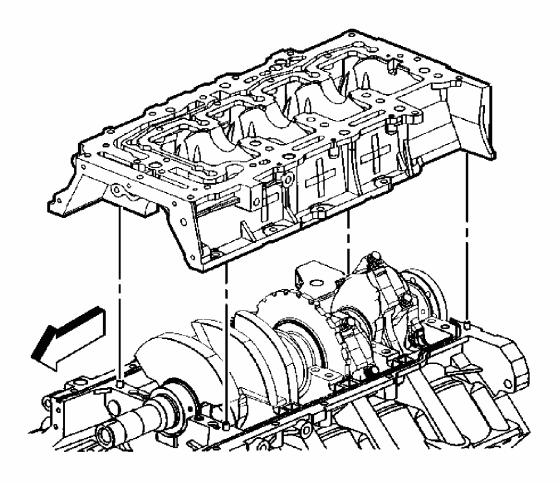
View Of lower Crankcase Courtesy of GENERAL MOTORS CORP.
